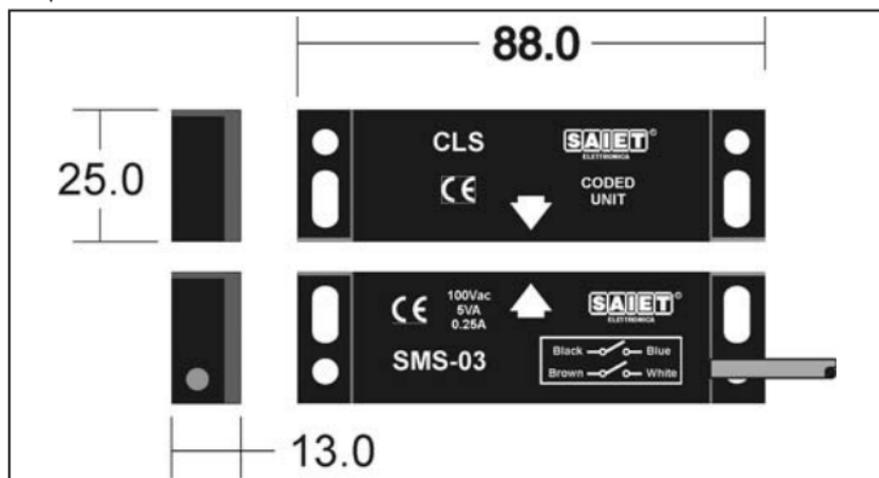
Mechanical dimensions of the sensors and the operating units parallelepiped housing.
